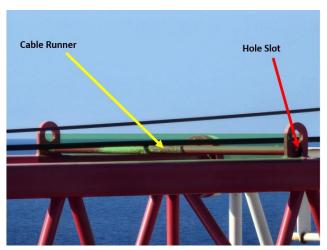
Corroded crane boom cable runner / roller on crane boom.
